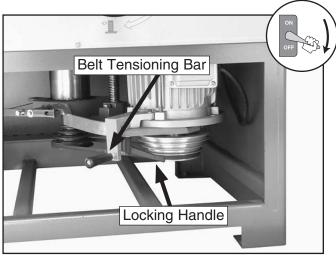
Belt tensioning bar and locking handle for changing spindle speeds.
